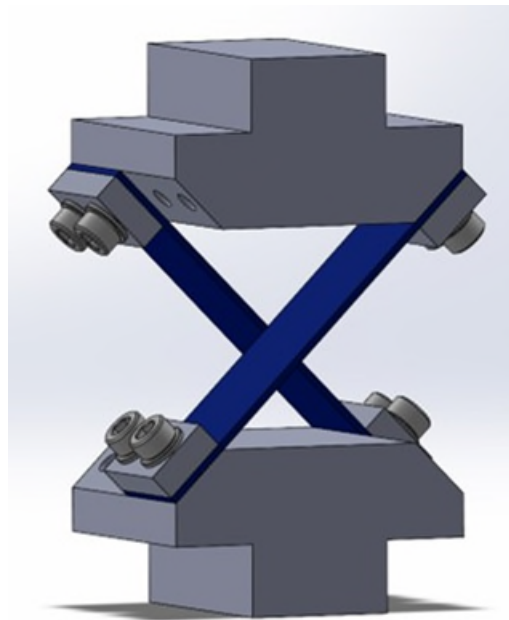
A Simple Cross Blade Flexure. This flexure is designed to be made by cutting hardened steel shim stock and clamping them to aluminum bases.
